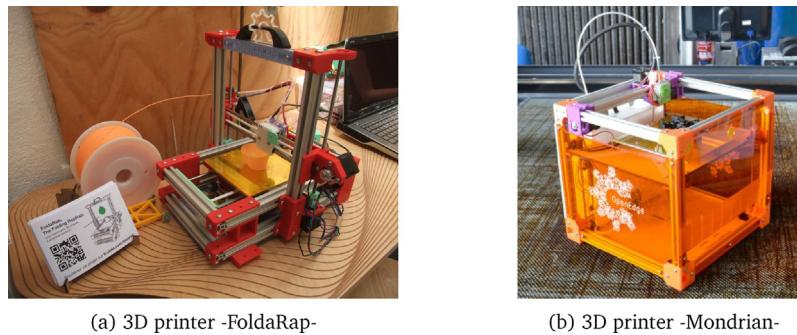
Open-source 3D printers used for the fabrication of the recycled test samples.
